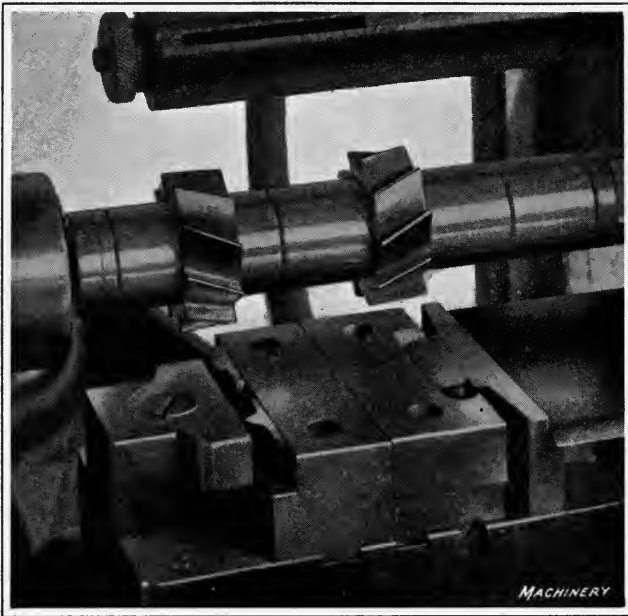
Design of Milling Fixture in which Three Pieces of Work are clamped by a Single Motion
